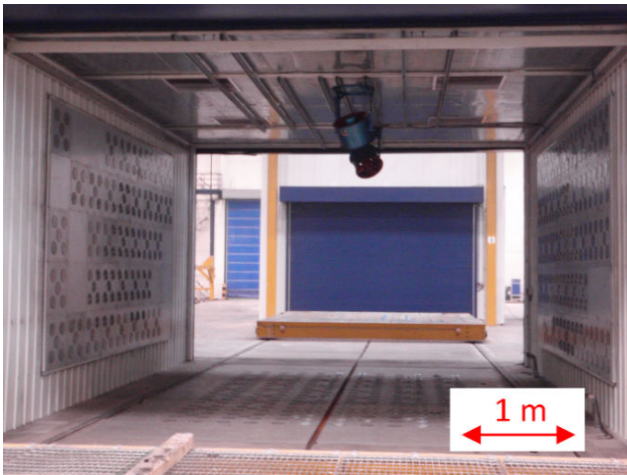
Example of drying cabinet used for the drying of water based coatings applied on sand moulds in the production of large size wind turbine components.
